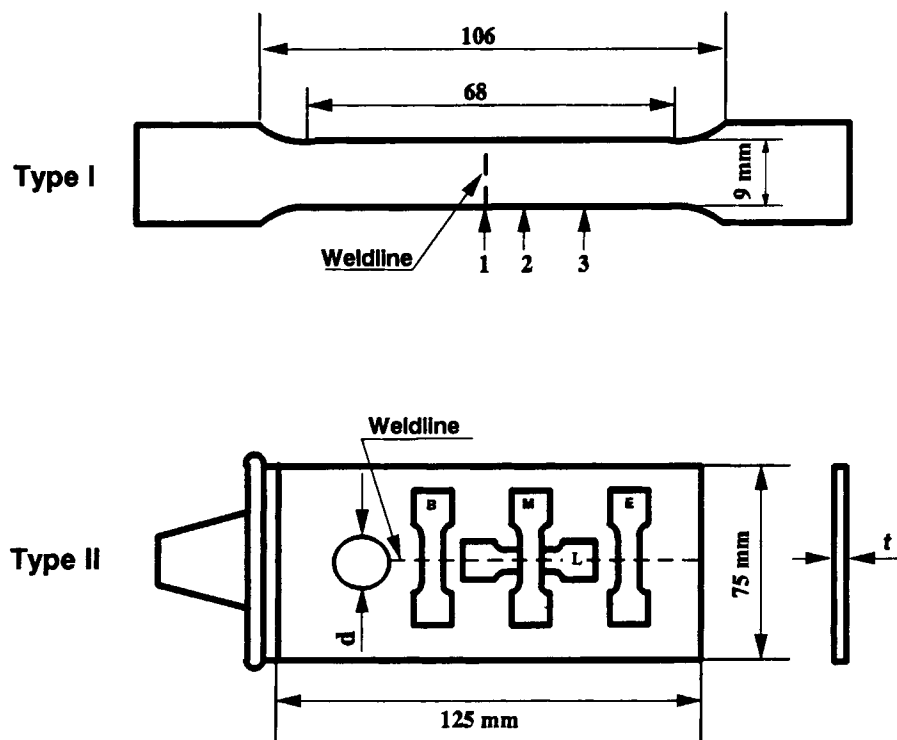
Mold cavities used in this work. Type I: Directly molded tensile specimens. Type II: Rectangular plaque with locations at which samples were machined. Plaque thickness: (t): 2, 4, and 6 mm; insert diameter (d): 6, 12, and 18 mm.
